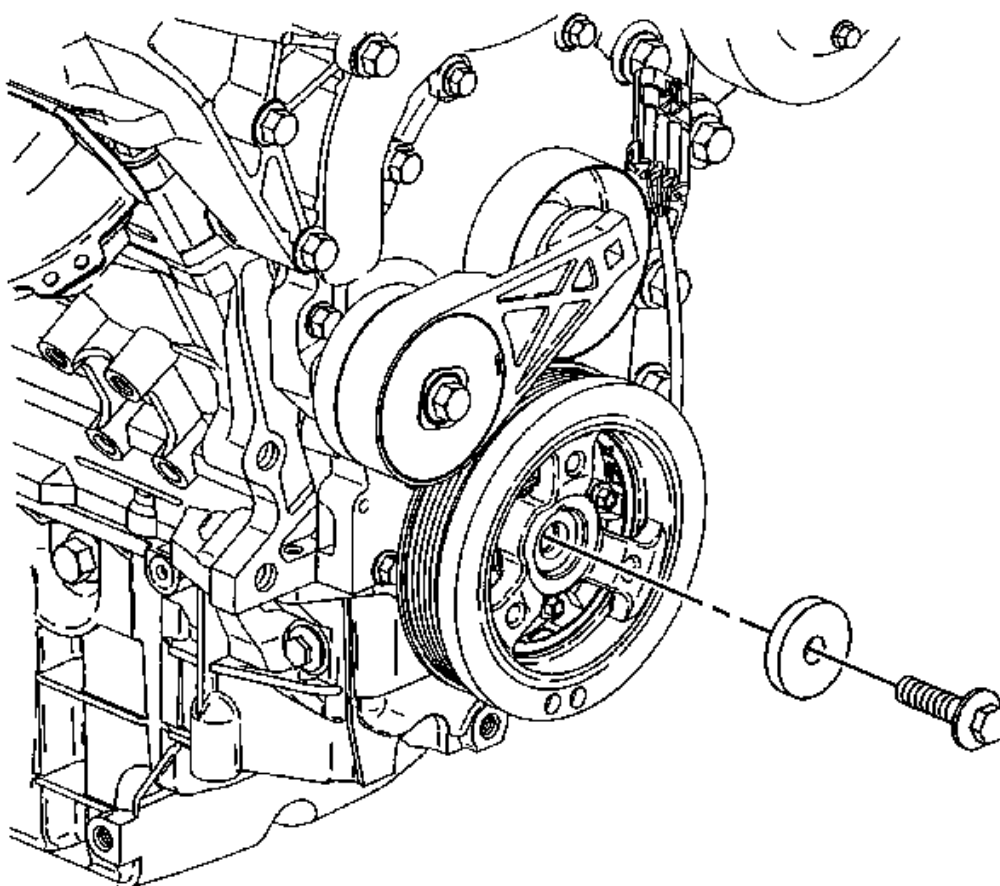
Identifying Crankshaft Balancer Bolt & Washer
